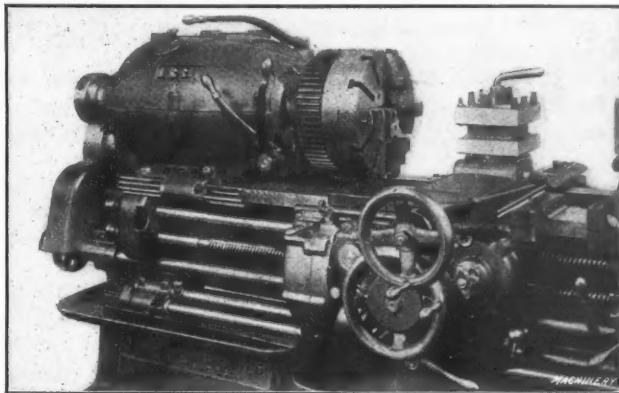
Same Machine (Five Minutes Later) with Four-jaw Chuck in Position
